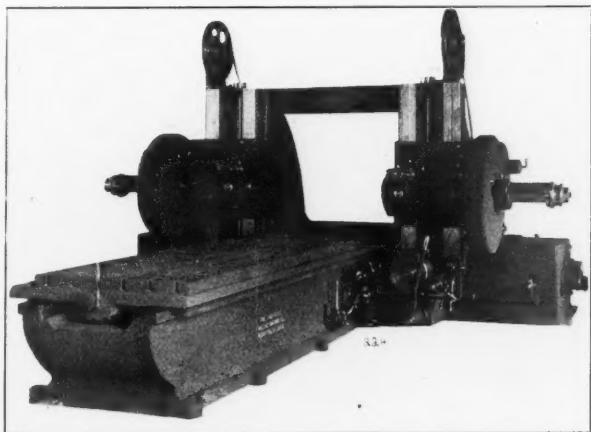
The Ingersoll 50-in. Heavy Type of Duplex Milling Machine.
